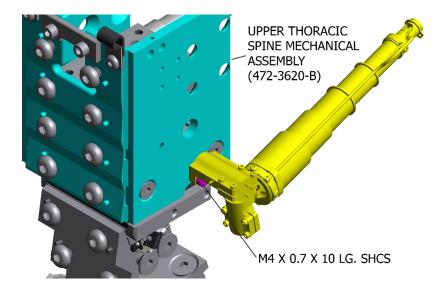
Mount Upper Thoracic IR-TRACCs to Upper Spine Mechanical Assembly
